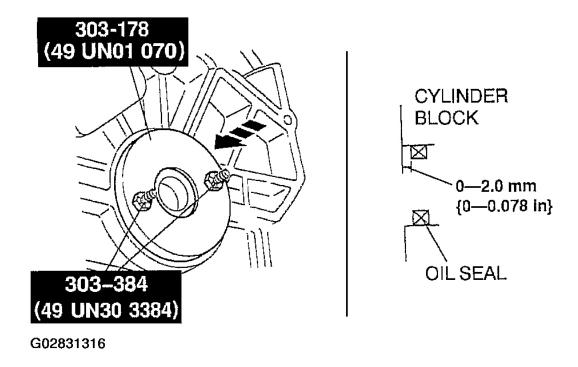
Installing Oil Seal Courtesy of MAZDA MOTORS CORP.
